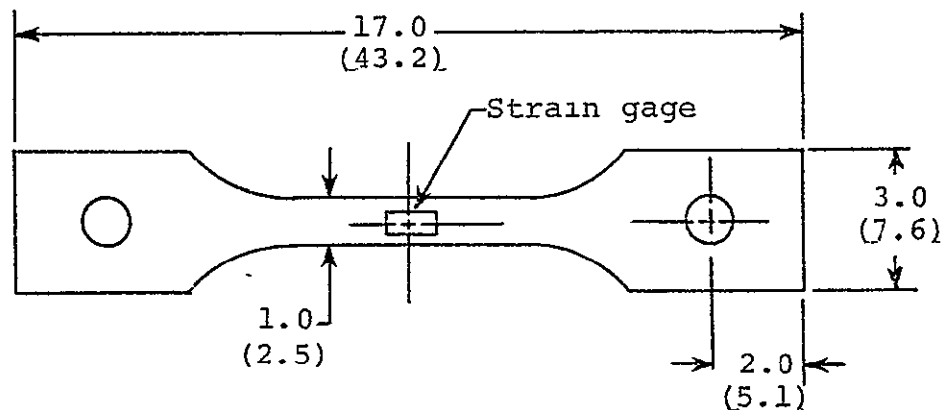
René 41 tensile specimen dimensions 0.037 inches (0.094 cm) thick. Dimensions in inches and (cm).
